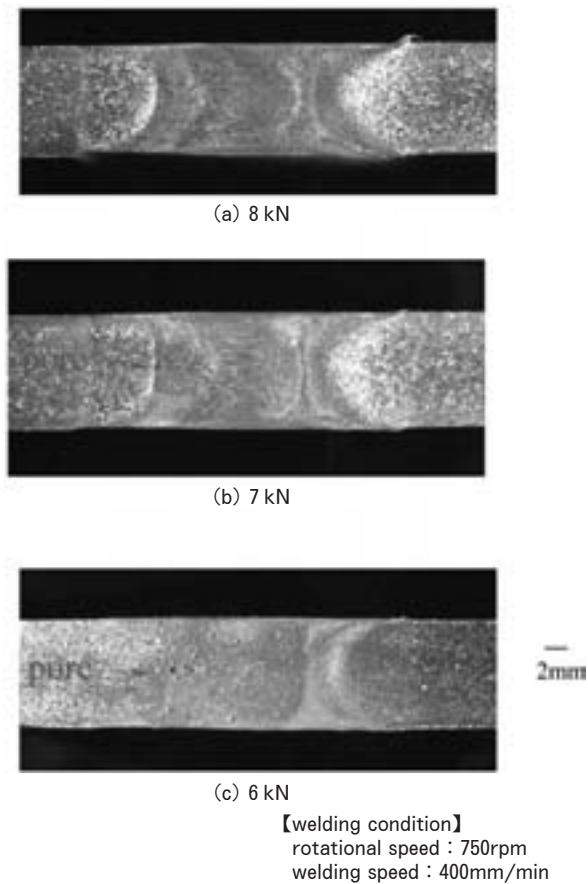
Macrostructure of welds on each pinch force.
